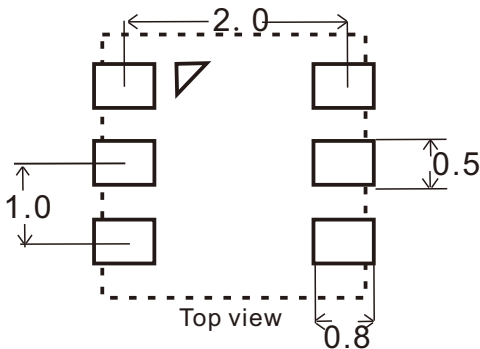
Recommended AHT20 PCB design size (unit: mm), the outer dotted line is the external size of the SMD package.
